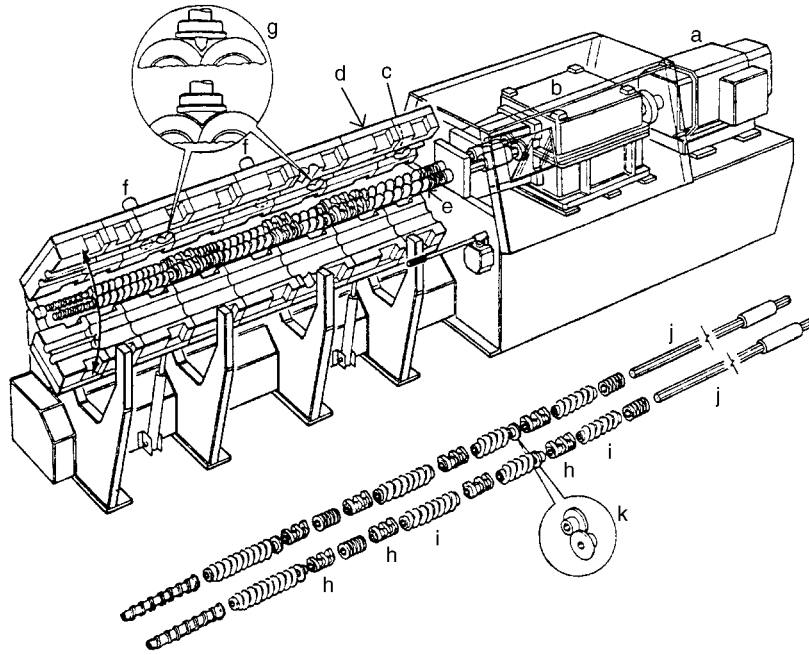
Intermeshing corotating twin-screw extruder: (a) drive motor; (b) gearbox; (c) feed port; (d) barrel; (e) assembled rotors; (f) vent; (g) barrel valve; (h) kneading paddles; (i) conveying screws; (j) splined shafts; (k) blister rings. (APV Chemical Machinery, Inc.)
